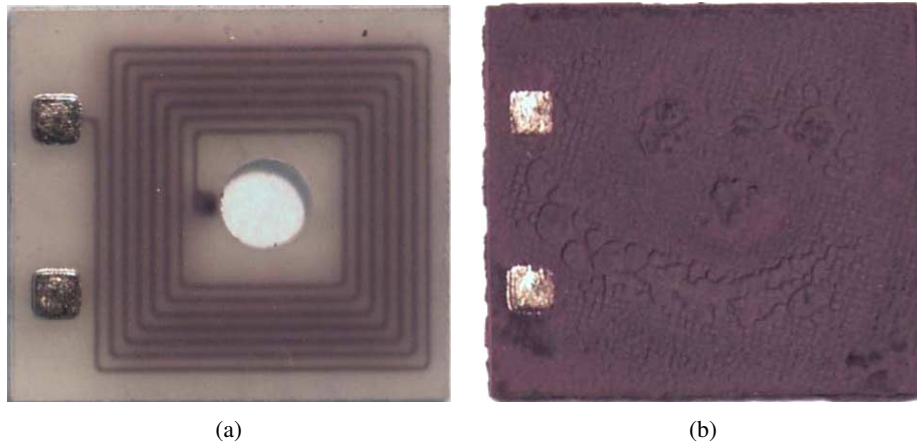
(a) Picture of the 4-layer PCB with winding. (b) Picture of the prototype after the screen printing and curing of the paste [35].
